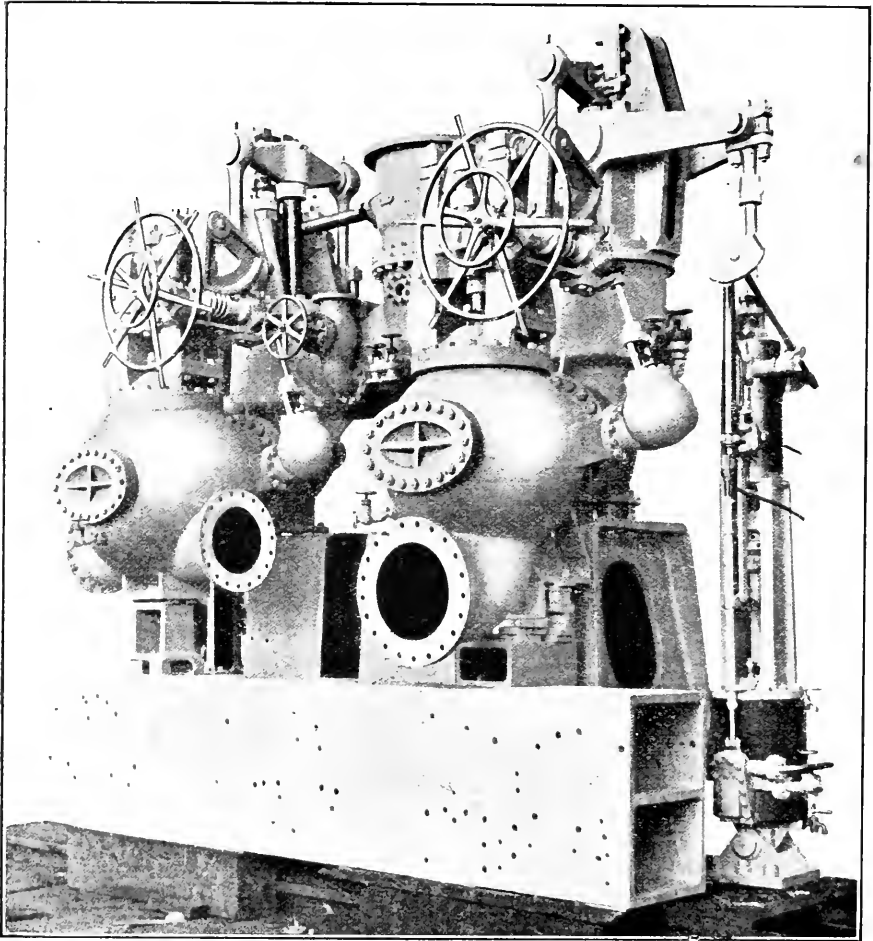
Manœuvring Gear, consisting of ahead and astern-manœuvring valve in front, with the intermediate valve behind, worked by means of a direct-acting steam engine.
